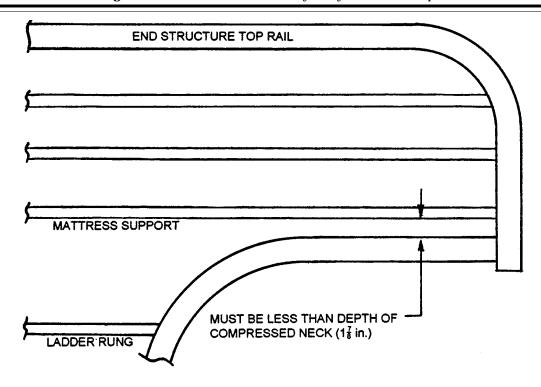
Fig. D – End Structure of Bed Modified to Reduce Vertical Dimension of Narrow Portion of Opening to Prevent Neck Entry
